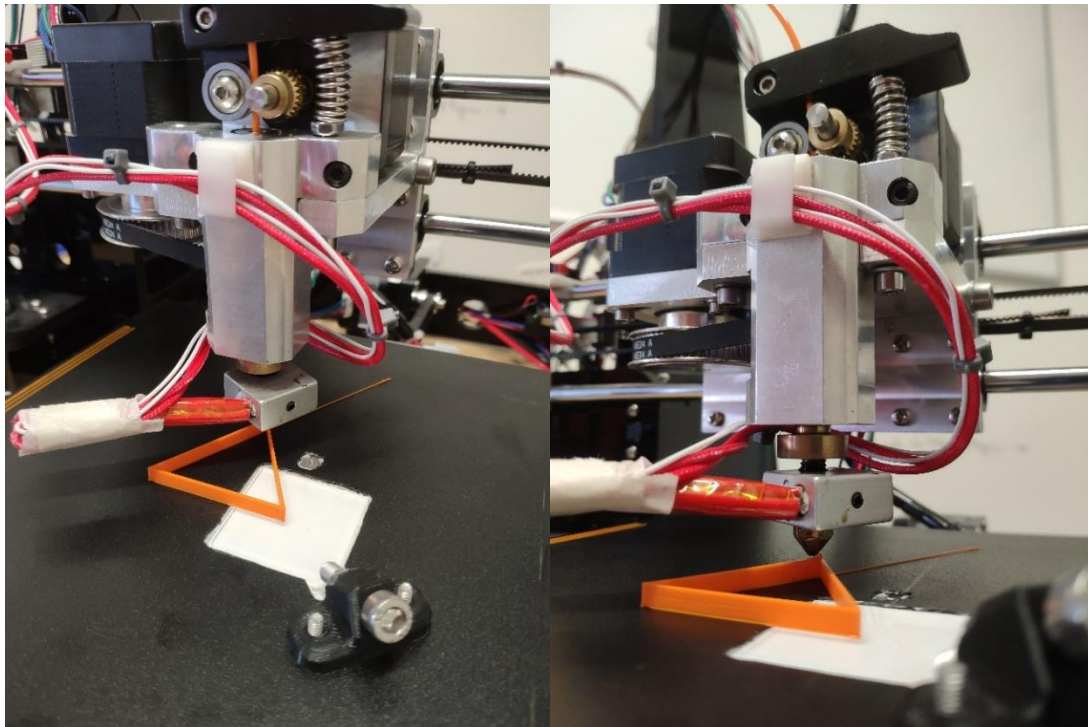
Experimental machine setup utilising a modified print bed with removable slide on a modified ANet A8M ME AM desktop printer for XY plane with a modified nozzle experimentation
